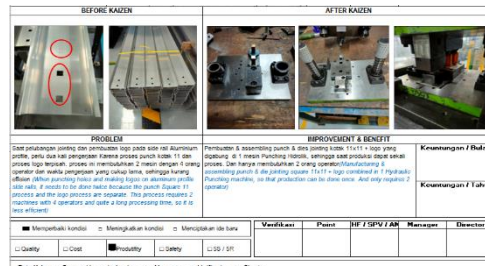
Welding Jig Making Figure 6. Merging holes and logo
